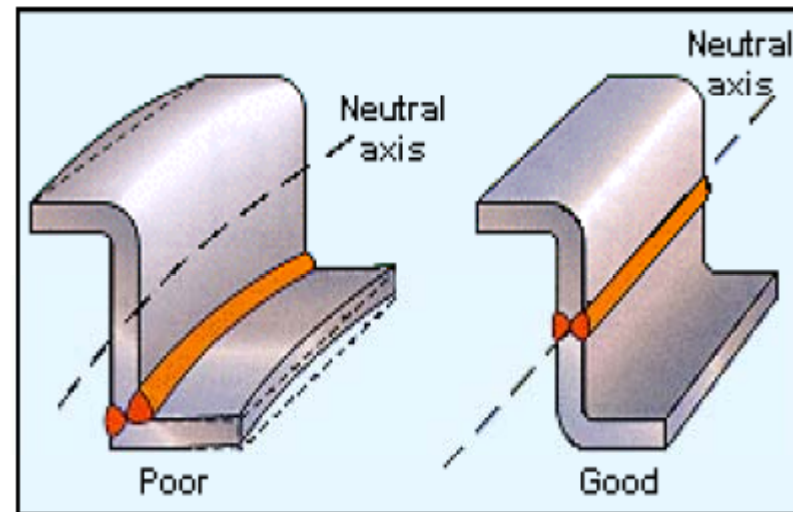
Distortion may be reduced by placing the welds around the neutral axis
